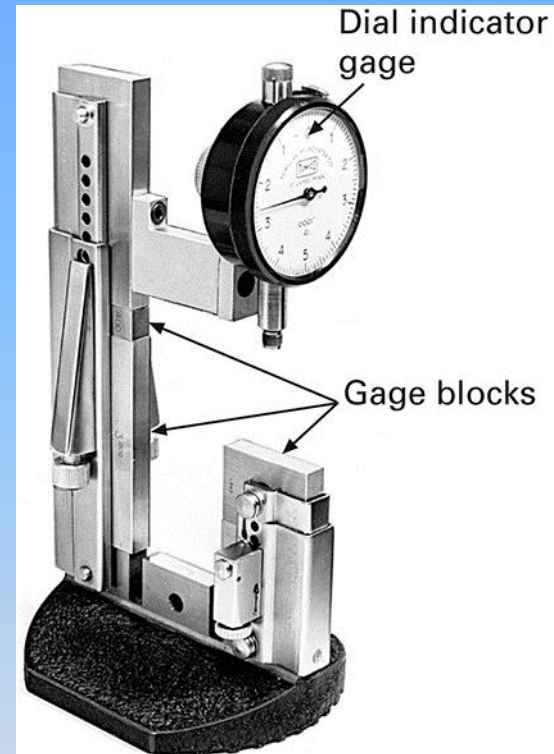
Wrung-together gage blocks in a special holder, used with a dial gage to form an accurate comparator. (Courtesy of DoALL Company.)
